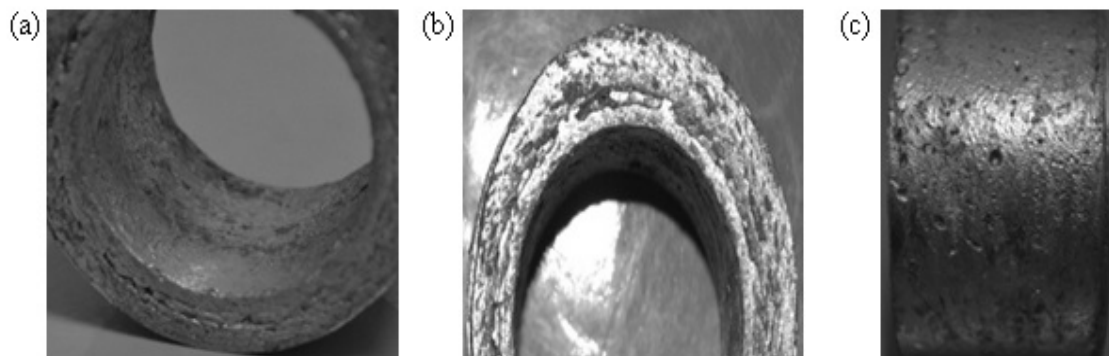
Physical properties of casting with temperature 725 °C. (a) Inner surface; (b) side surface; (c) outer surface.
